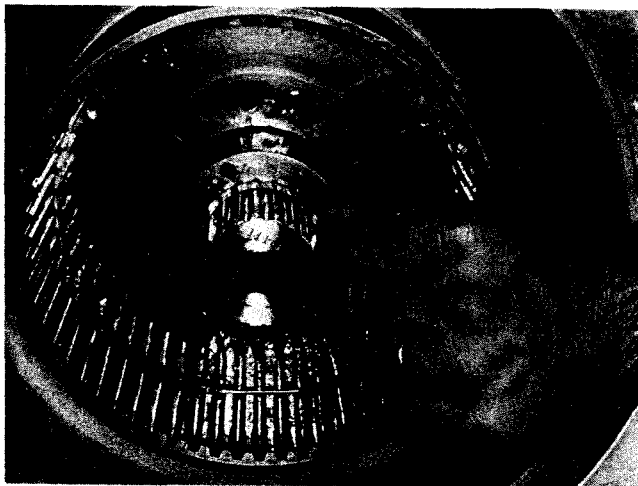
, (V22002). Removing snap ring from drive shaft
